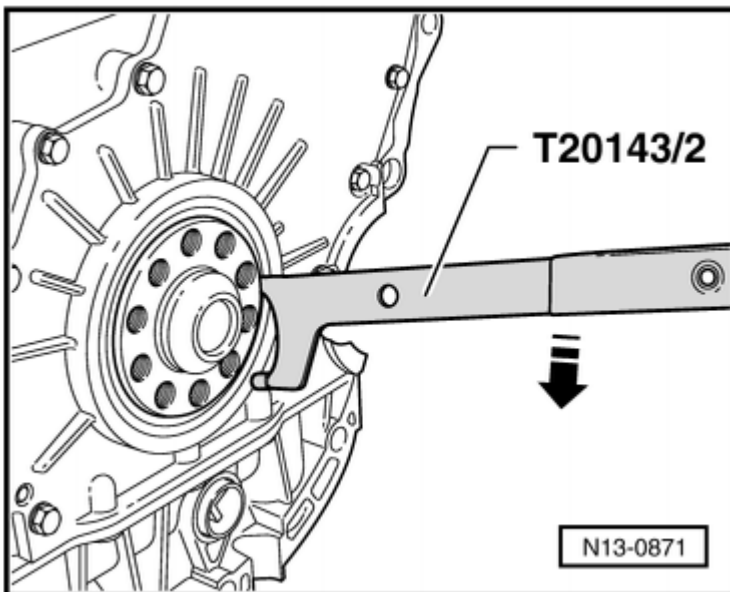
Identifying Removal Hook T20143/2 Placed Behind Sealing Lip Of Oil Seal
